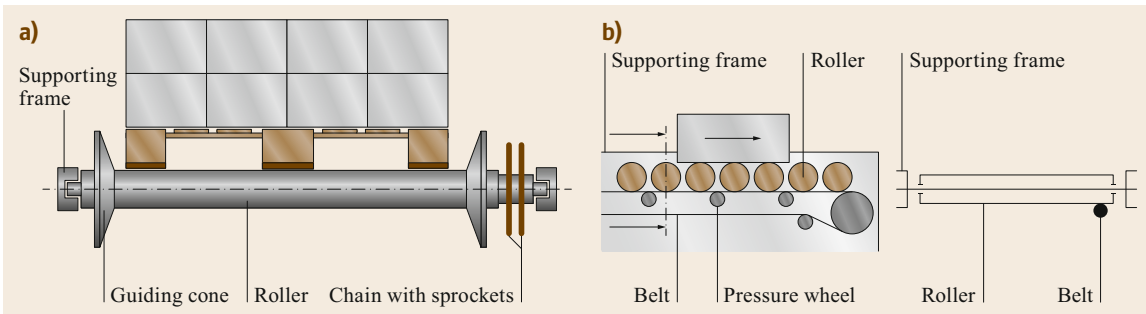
,b Driving possibilities for roller conveyors: (a) heavy roller conveyor for pallets driven by chains, (b) roller conveyor for medium to light goods with nonpositive transmission belt [20.5]
